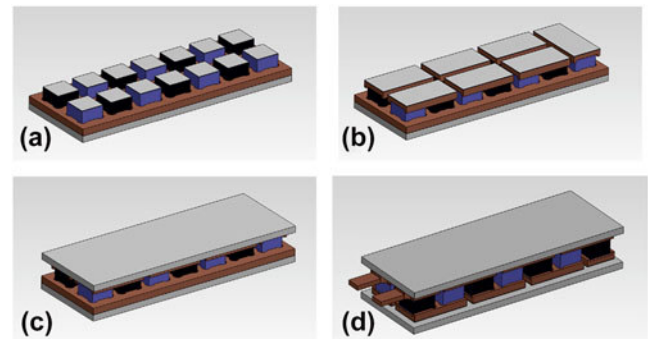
Schematic diagram for assembly steps for single board side (a, substrate with positioning device, legs, and filler foil; b, Cu sheets with filler foil; c, complete single board side assembly; and d, completed module with connector tabs).
